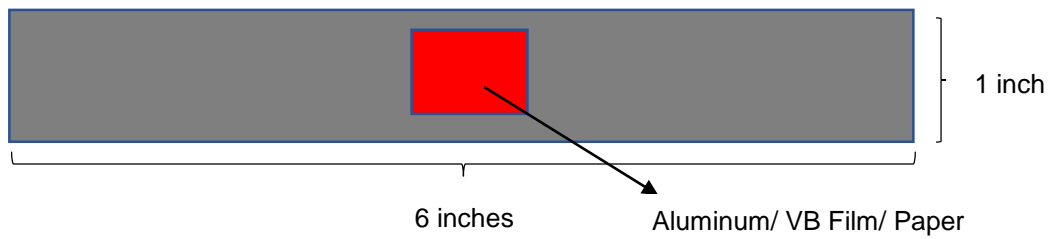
Schematic of hybrid unidirectional composite specimen and the types of defects implanted
